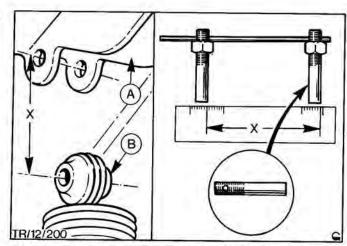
Measuring 'X' dimension/tool for setting dimension 'X'.
